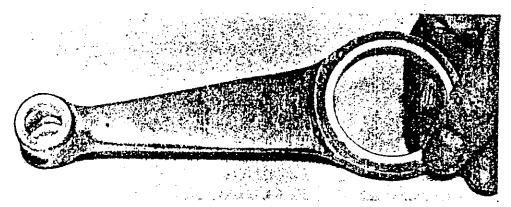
Showing Centre-Punch Mark on Con Rod.
